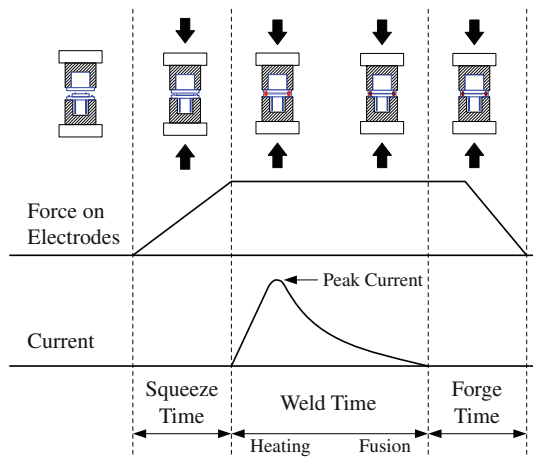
Typical welding cycle for resistance projection welding
